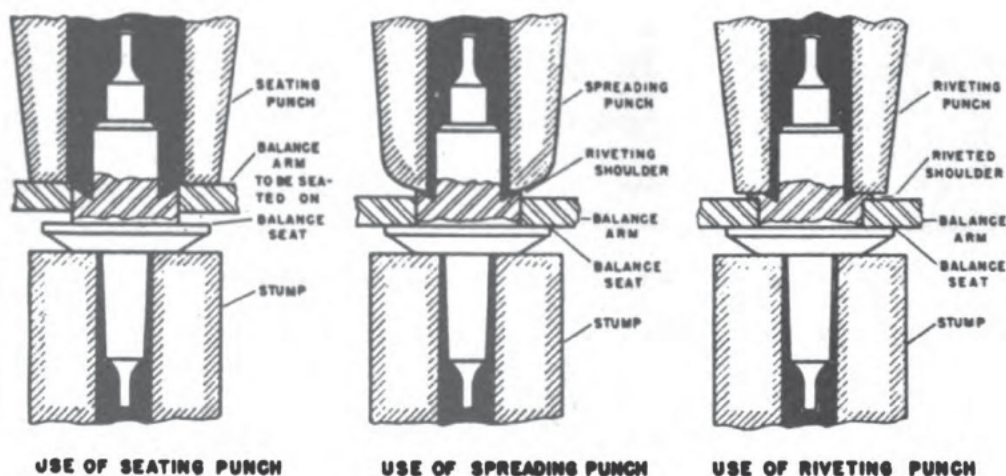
Steps to be followed in staking a standard rivet-type balance staff.
